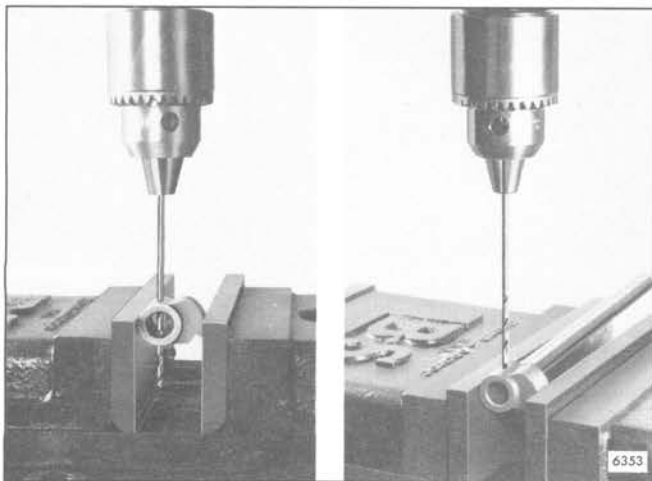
Aligning Drill Bit and Drilling Shaft
